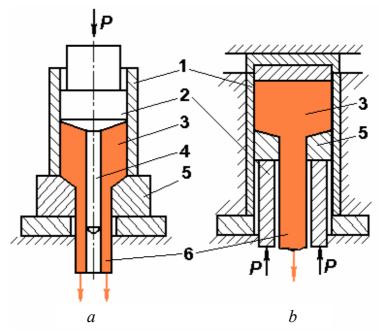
Direct pressing (a) and reverse pressing (b): 1 – container; 2 – punch; 3 – work-piece; 4 –needle; 5 – matrix; 6 – section
